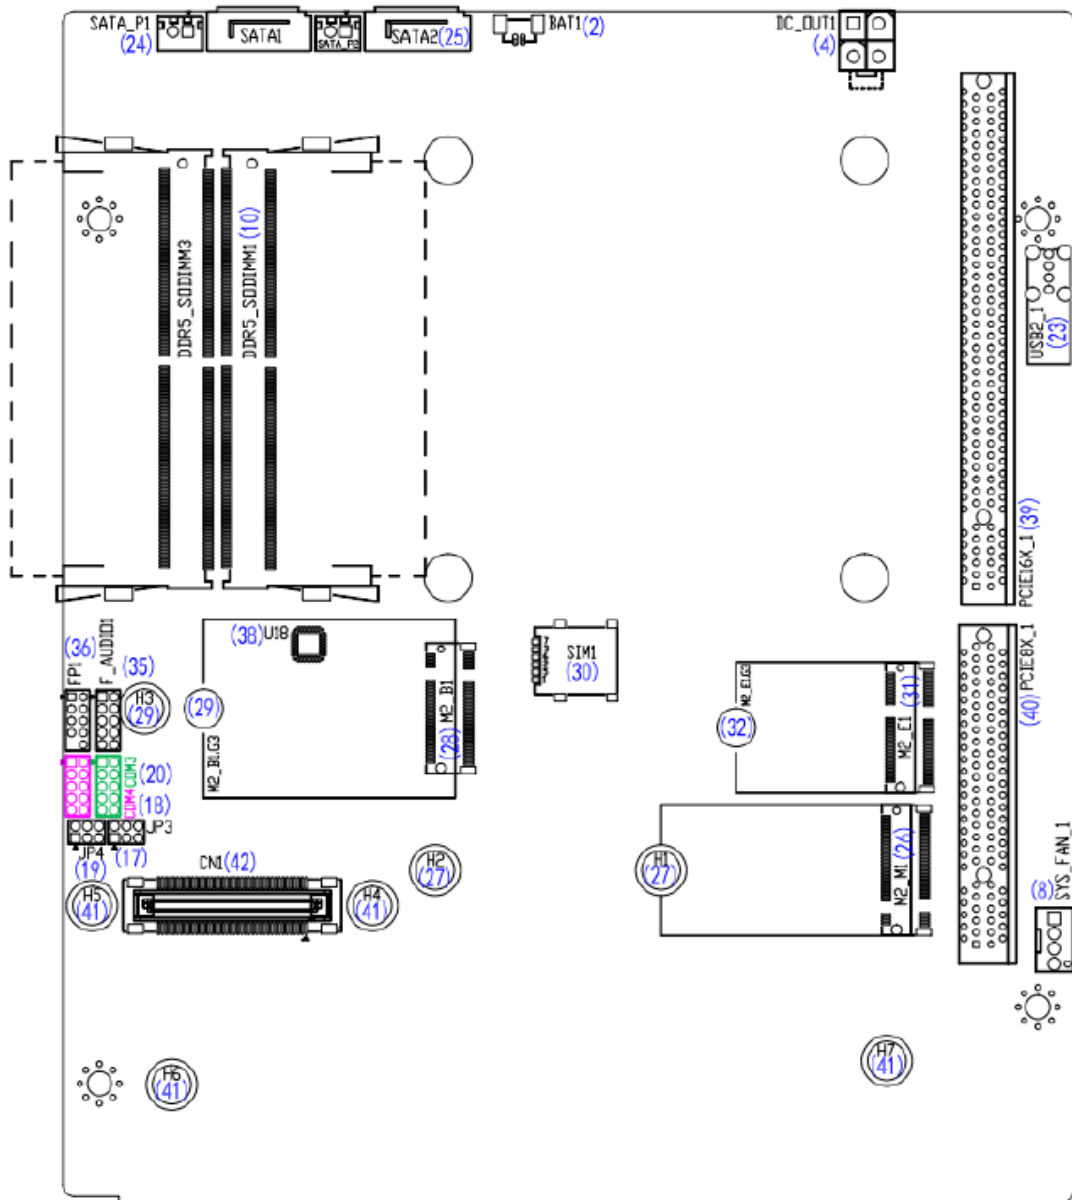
Jumpers and Connectors Location- Board Bottom
